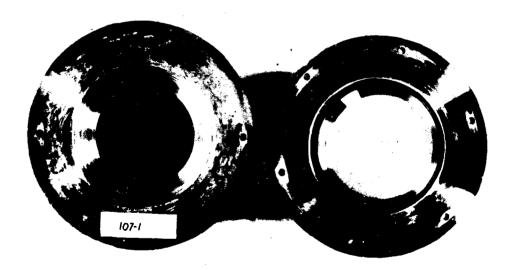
Aluminum angular flange test jig without anode after exposure showing corrosion of flange to seal.
